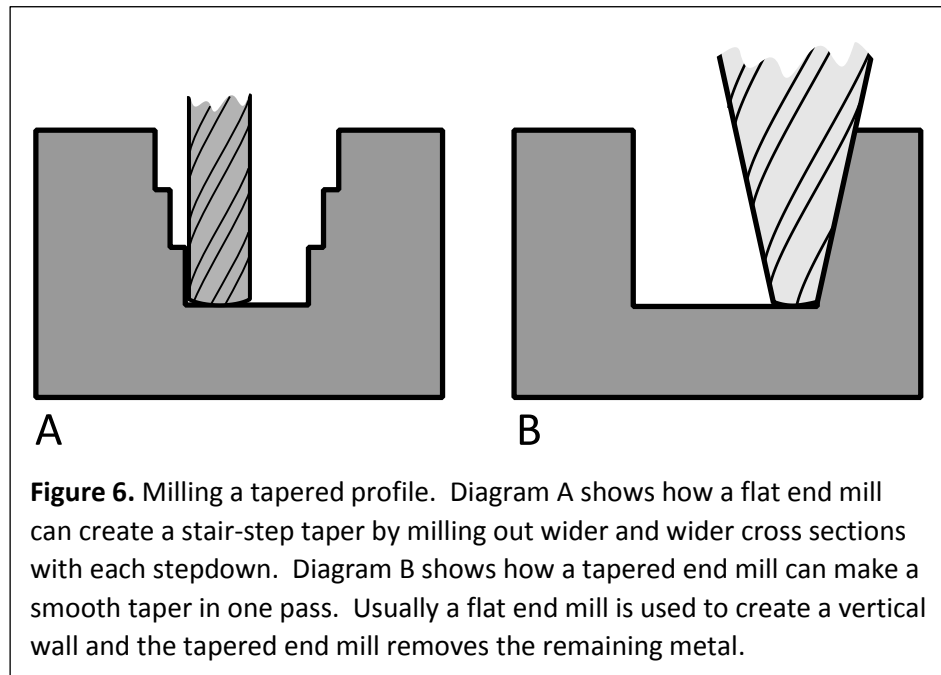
Milling a tapered profile. Diagram A shows how a flat end mill can create a stair-step taper by milling out wider and wider cross sections with each stepdown. Diagram B shows how a tapered end mill can make a smooth taper in one pass. Usually a flat end mill is used to create a vertical wall and the tapered end mill removes the remaining metal.
